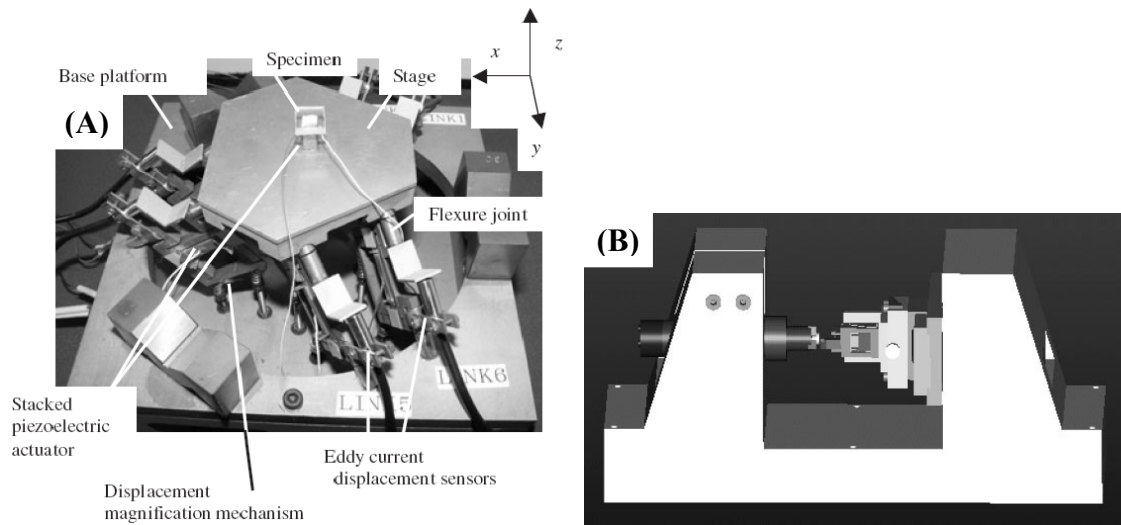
Stewart platform for use with an AFM (A) [28] and layout of bench-type nanometer machining platform (B) [29]
